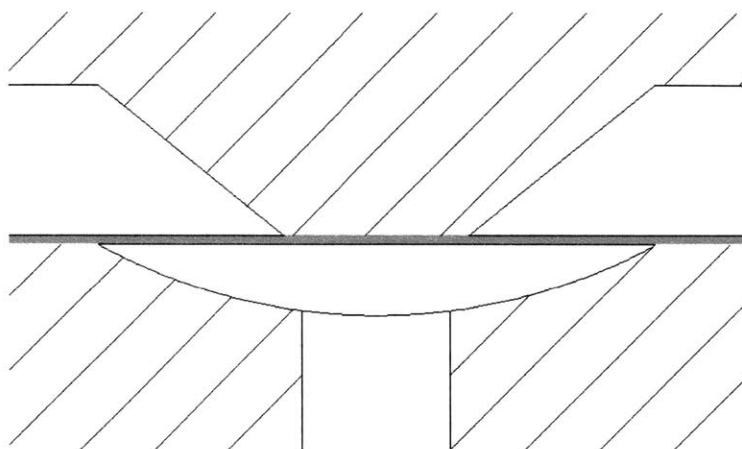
Cross-section of a valve and the fluidic channels above it
